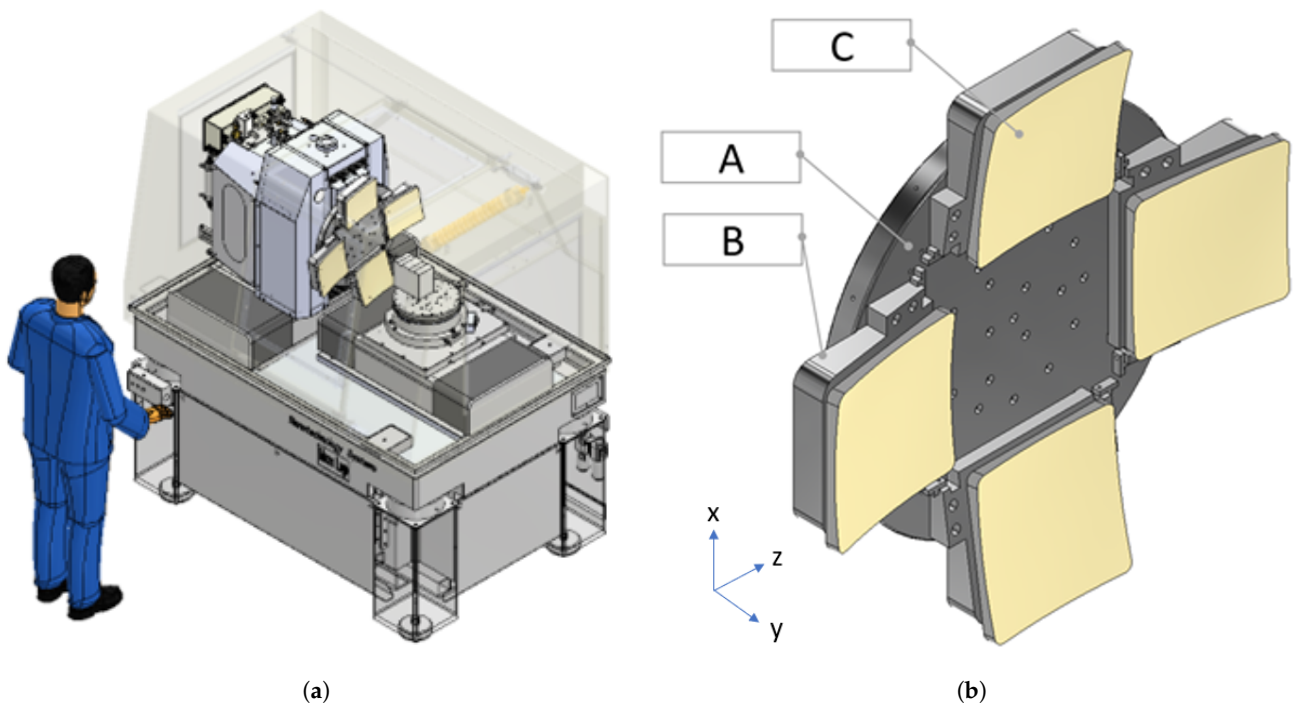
(a) Example of a conventional fixture during machining on a Moore Nanotech 350FG at the Centre for Advanced Instrumentation at Durham University. (b) Conventional machining fixture composed of three elements. Element A is the backing plate, B are four wedges used to apply the off-axis angle on each segment and finely position each mirror on the backing plate, and C are the four segments.
